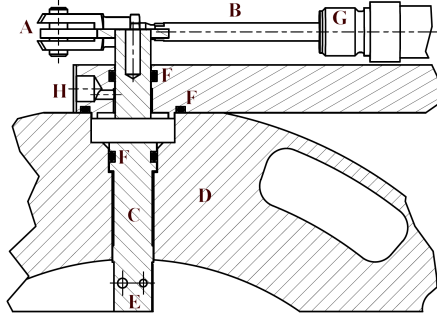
UCN shutter: Technical drawing of the mechanical feedthrough. The pneumatic cylinder is acting on the shutter axis via a lever arm outside the vacuum. The axis feedthrough can be differentially pumped. The holes on the bottom of the axis are used to mount the shutter blades. A: lever arm, B: piston, C: rotation axis, D: frame, E: axis mounting for blades, F: viton sealing, G: pneumatic actuator, H: pump port;
